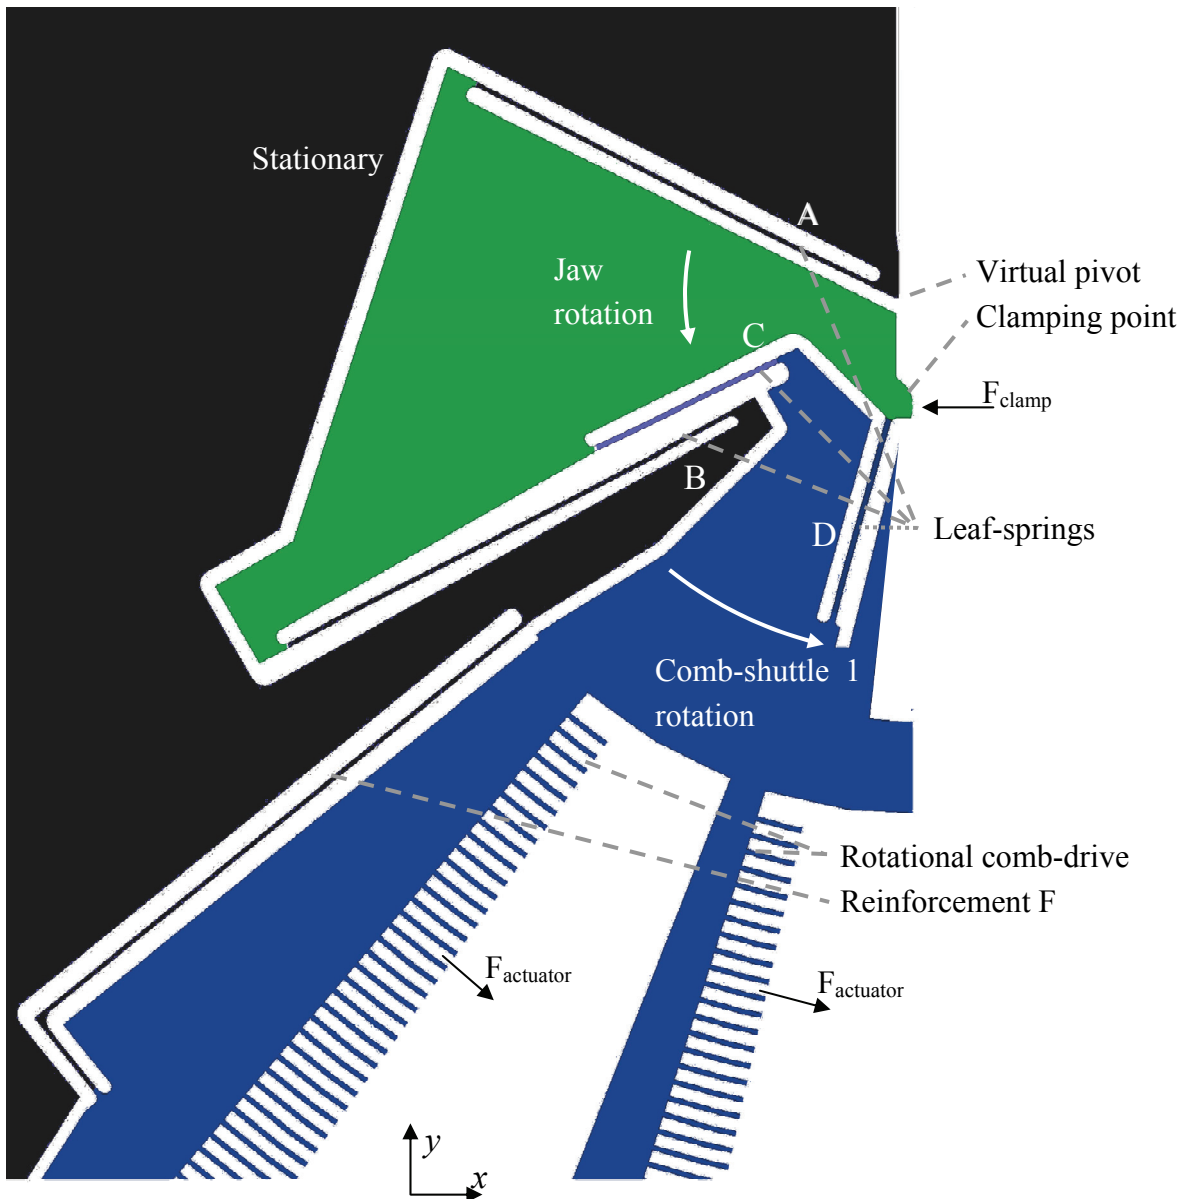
Half the clamping mechanism. The black body is stationary.
